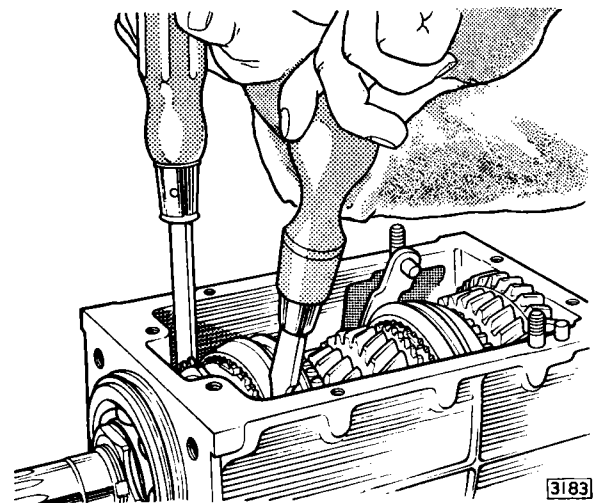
With the aid of two levers ease the constant pinion shaft forwards
